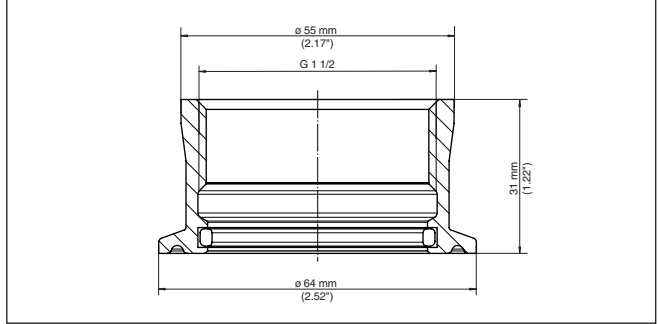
Dimensions of threaded adapter G1½ (DIN 3852-X) on Clamp 2" (DIN 32676, ISO 2852) PN 16
